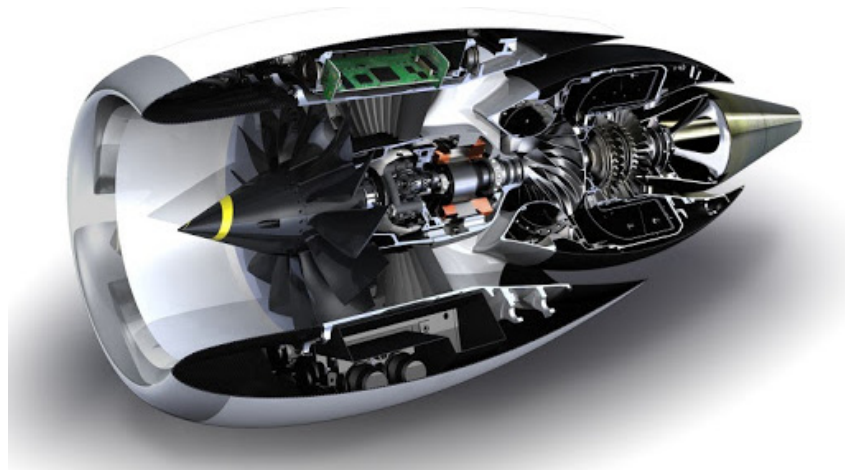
Price Induction DGEN 380 jet engine cross-section view [8].
